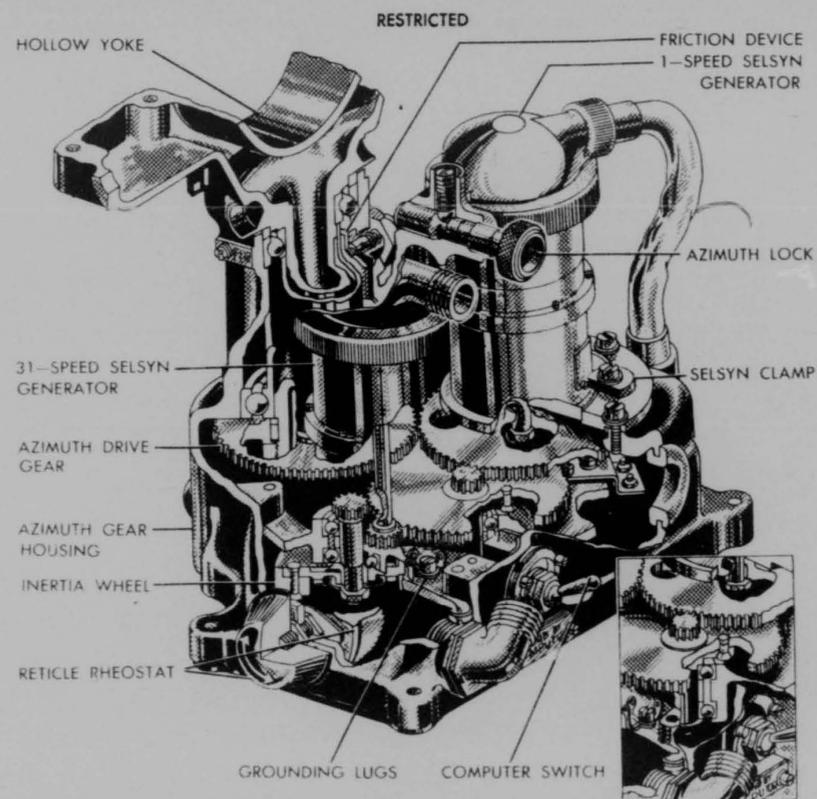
Cutaway View Azimuth Assembly Showing Gears, Shafts, etc.
